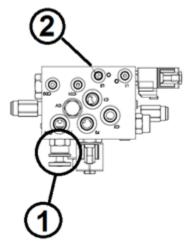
Front Belt Motor Adjustment Key 1 – Hand Valve Key 2 – Manifold (reference)
